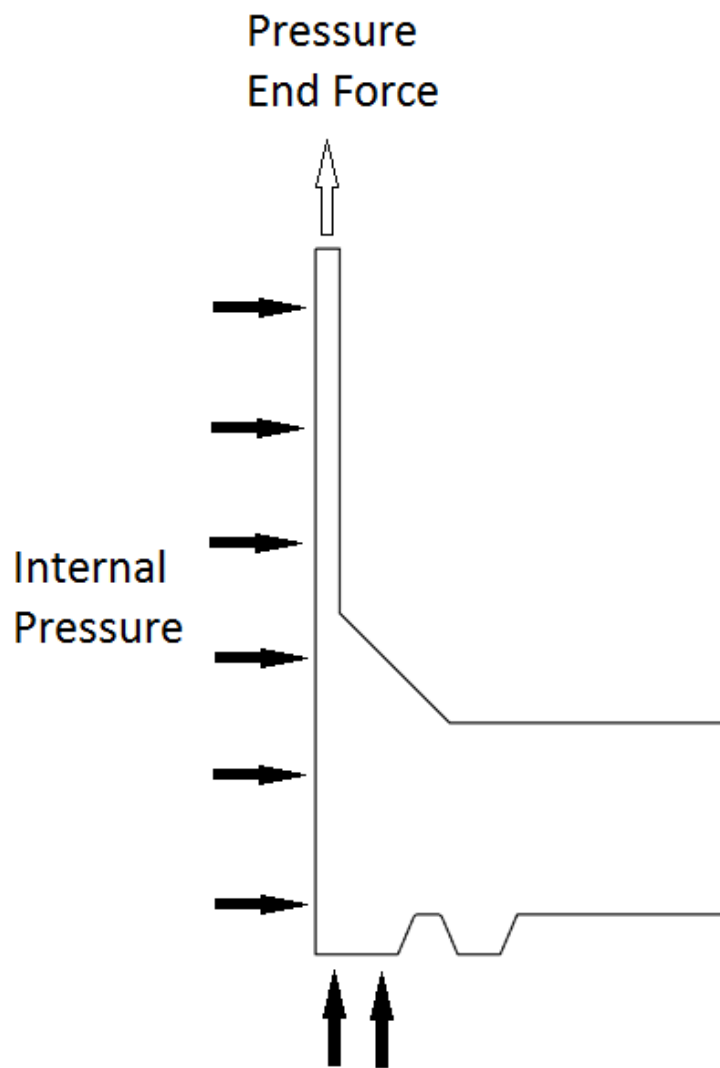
The surfaces where the internal pressure is applied on the flange part.
